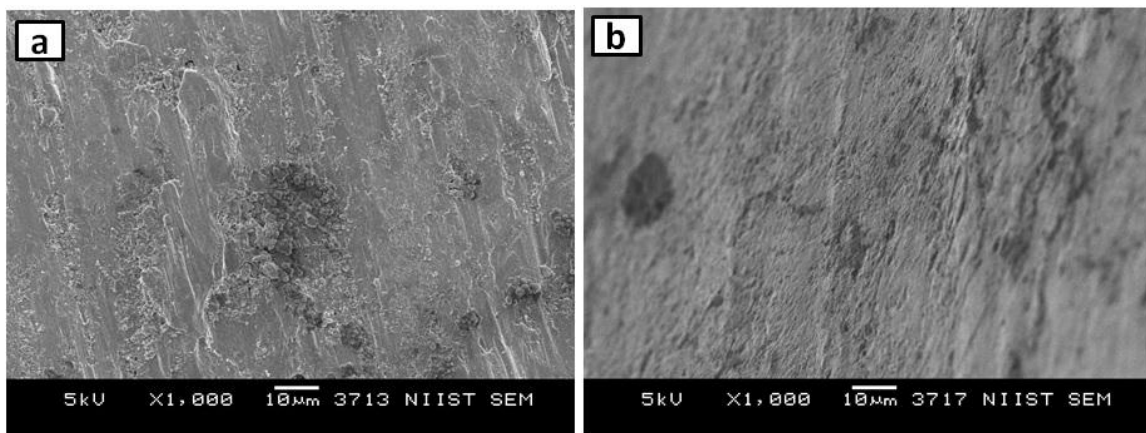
SEM analysis of fracture surface of compression specimens (a) A390-A319 and (b) A390-A6061
